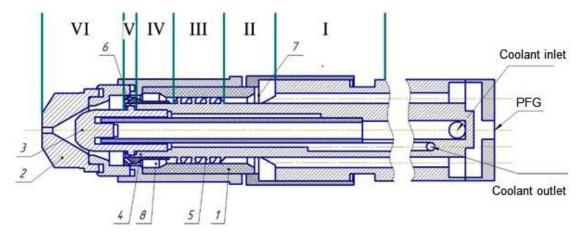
Design diagram of the plasma torch. Plasma torch elements: 1 - insulator, 2 - nozzle, 3 - cathode, 4 - electrode holder, 5 - preliminary (forming) swirler, 6 - main (stabilizing) swirler, 7 - 1st expansion (mixing) chamber, 8 - 2nd expansion (stabilizing) chamber. GAP sections: I - PFG feed, II - pre-flow equalization, III - pre-swirl, IV - main flow equalization, V - main swirl, VI - nozzle assembly. PFG - plasma-forming gas.
